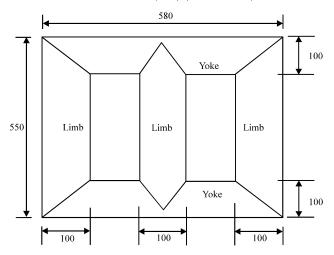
Dimension (mm) of 100 kVA transformer core model
